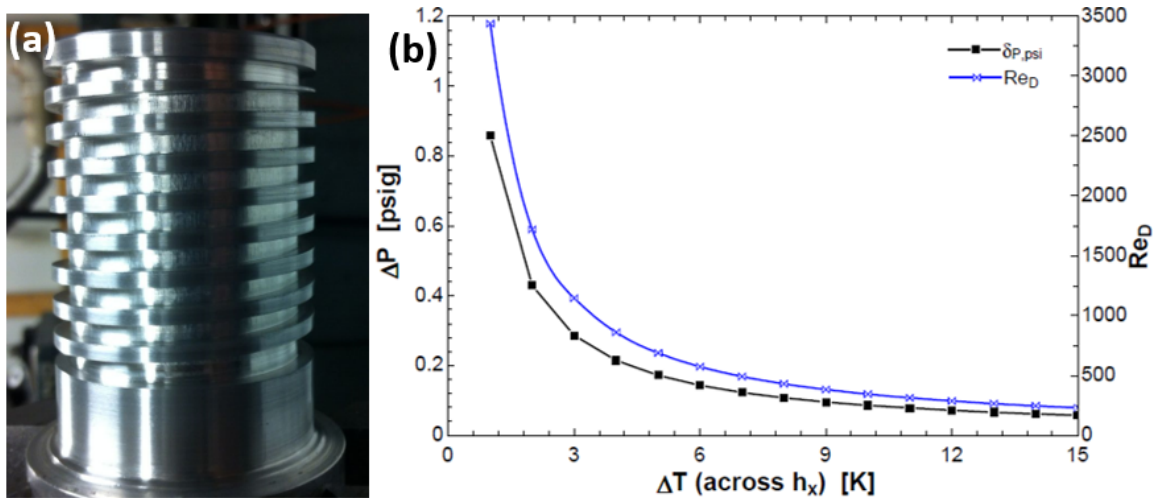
(a) The heat exchanger channels (helical grooves) cut on a thick walled Aluminum cylinder. Another thin walled Aluminum tube is press fitted over this grooved cylinder, and an inlet and outlet tube is connected to the bottom and top of the grooves, creating a closed loop heat exchanger. (b) The calculated pressure drop as a function of Reynolds number. This exercise was performed to measure the circulator pump requirement.
